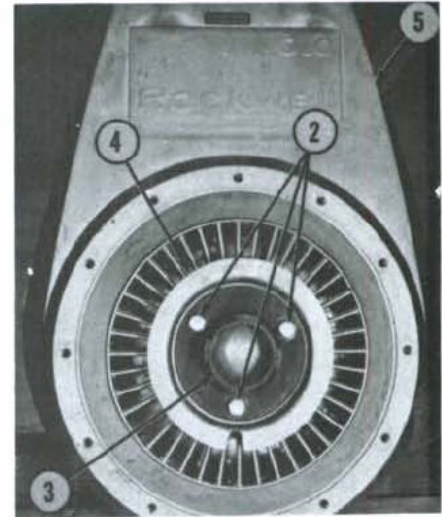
With starter removed as shown in Fig. 5, remove the three screws (2) and lift off starter hub (3) and rope pulley (4). Fan cover (5) can now be unbolted and removed.
